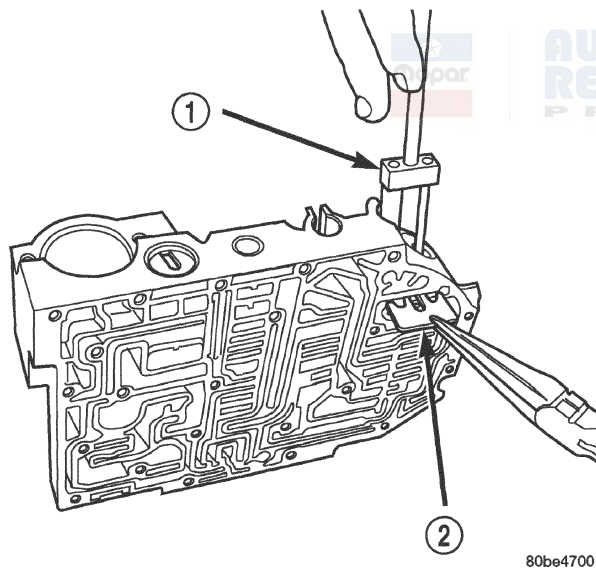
Install Regulator Valve Spring Retainer using Tool 6302
